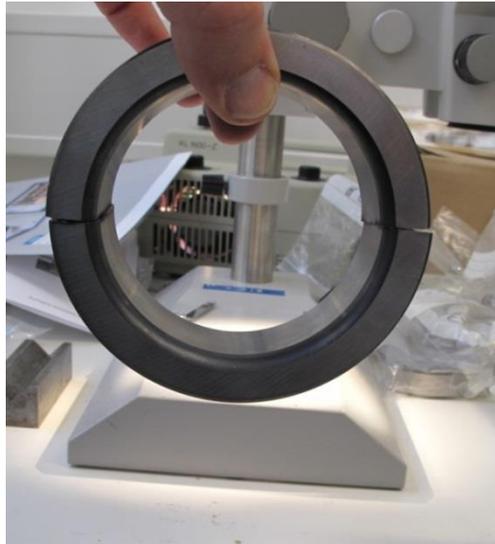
Lifted two halves of a cut bearing (type 6317), holding together by remanence magnet force. The bearing suffered circulating bearing currents for 2000 h [3].
